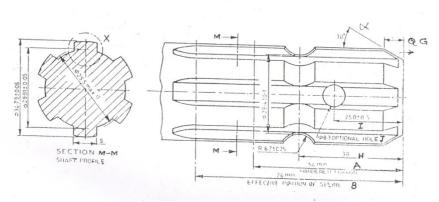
Dimensions of Implement Power Input Shaft, mm
